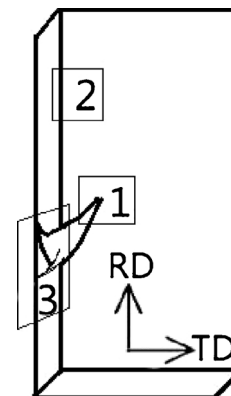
Schematic drawing of acquired sample position in rolled AZ31 magnesium alloy sheets.
